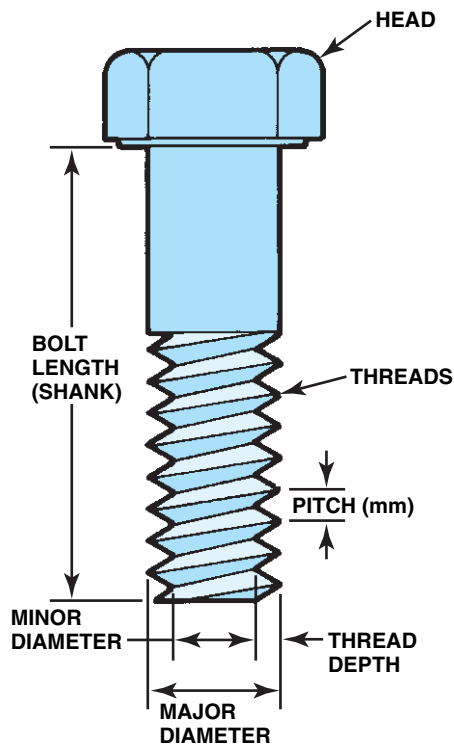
The dimensions of a typical bolt showing where sizes are measured.
